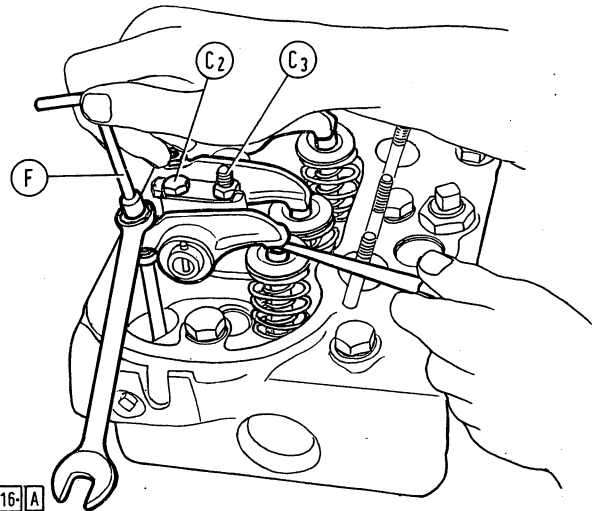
Measuring the valve gap with a feeler gauge. C₂. Capscrew securing the rocker arm support to the cylinder head. - C₃. Attaching stud, rocker arm support to cylinder head, and valve cover. - F. Wrench A 313046.
